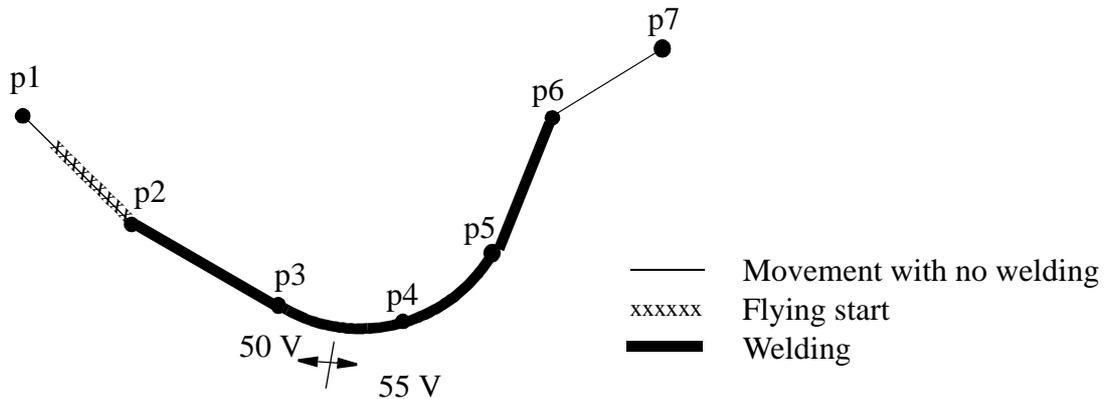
The weld data is changed after a specified distance on the circular path.
